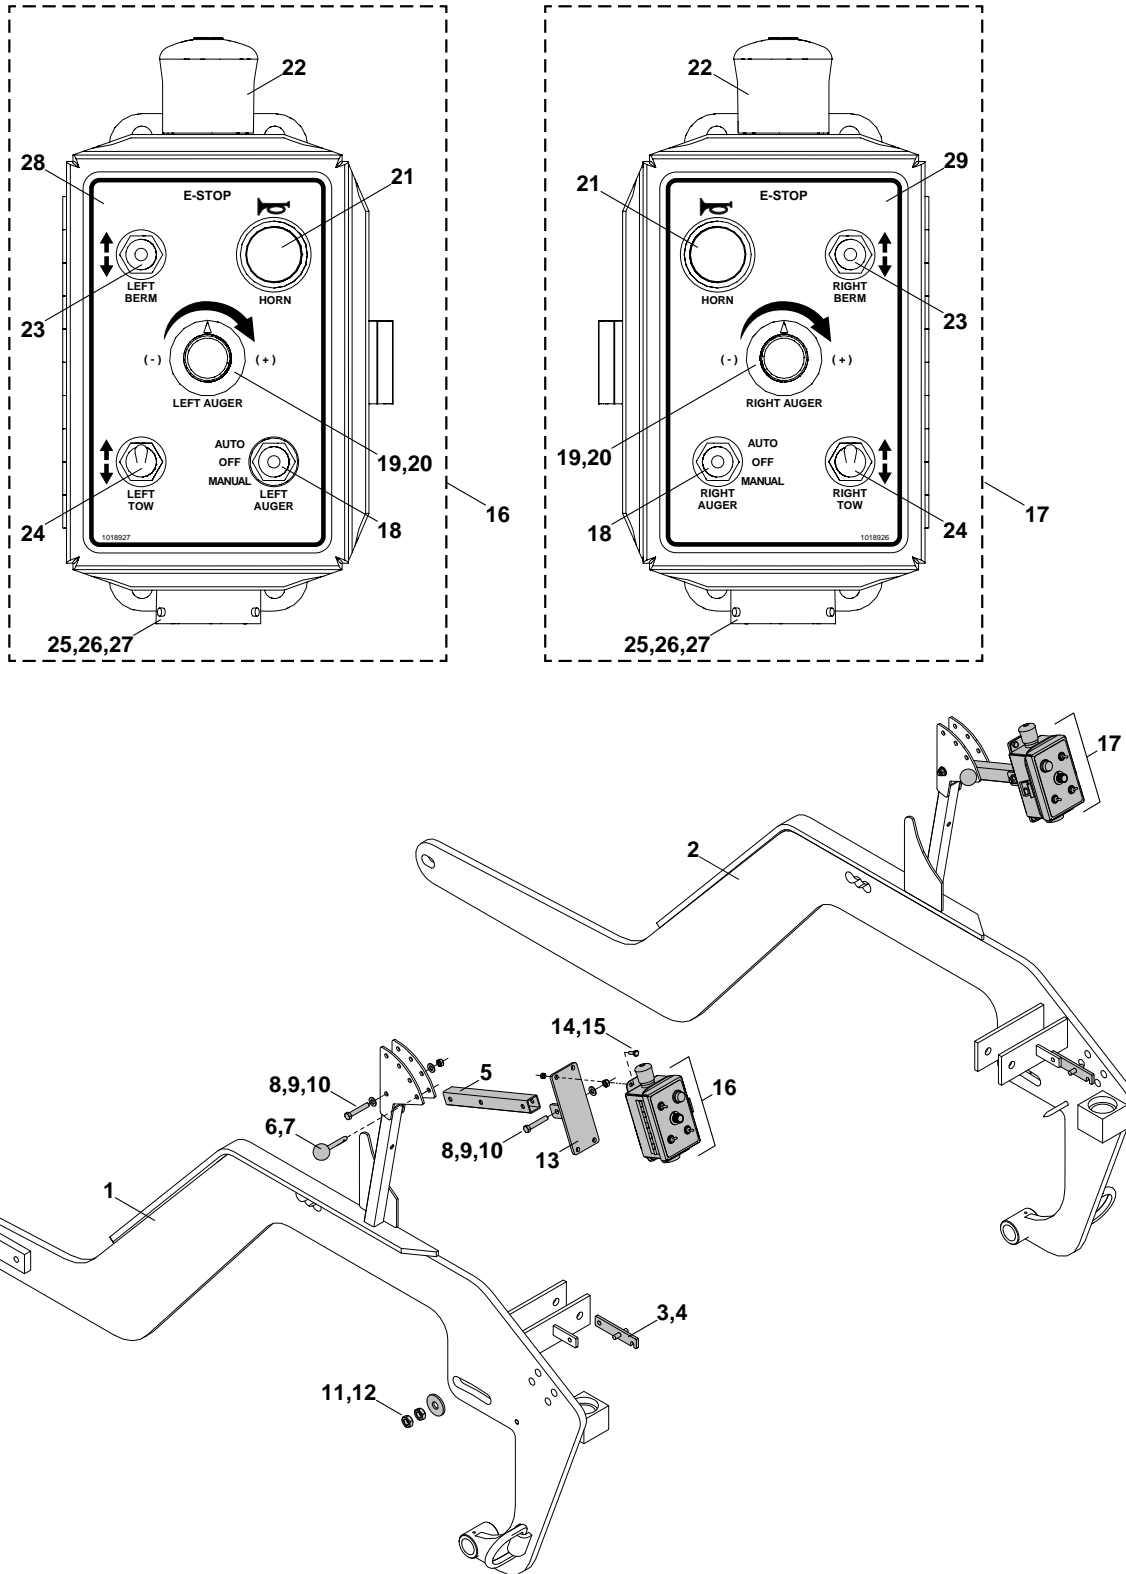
HD Screed Pull Arm Assembly - Left/Right
